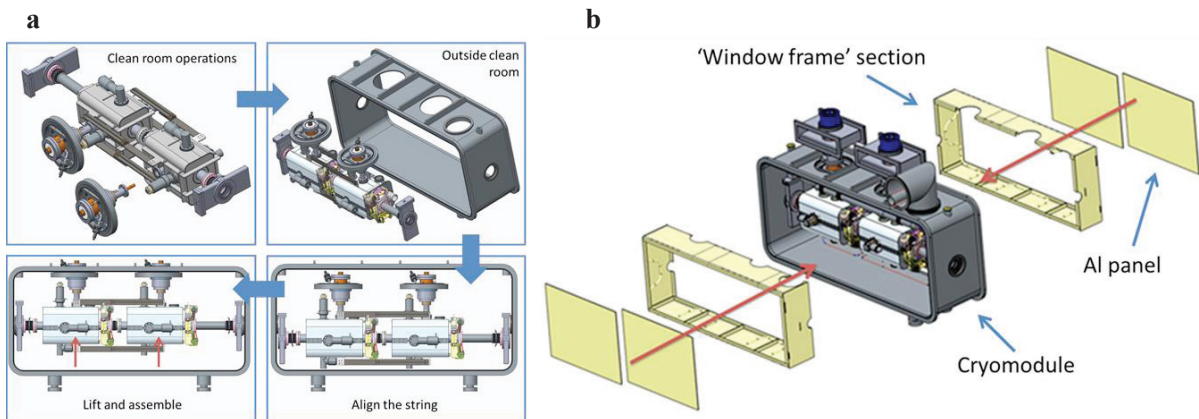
(a) Assembly sequence for loading the cavity string in the cryomodule and (b) Assembly sequence for installing the thermal shields
